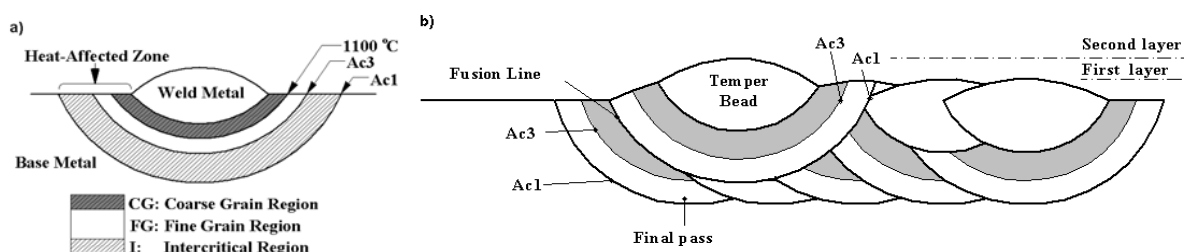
a) single weld bead regions nomenclature; b) double layer and temper bead techniques.
